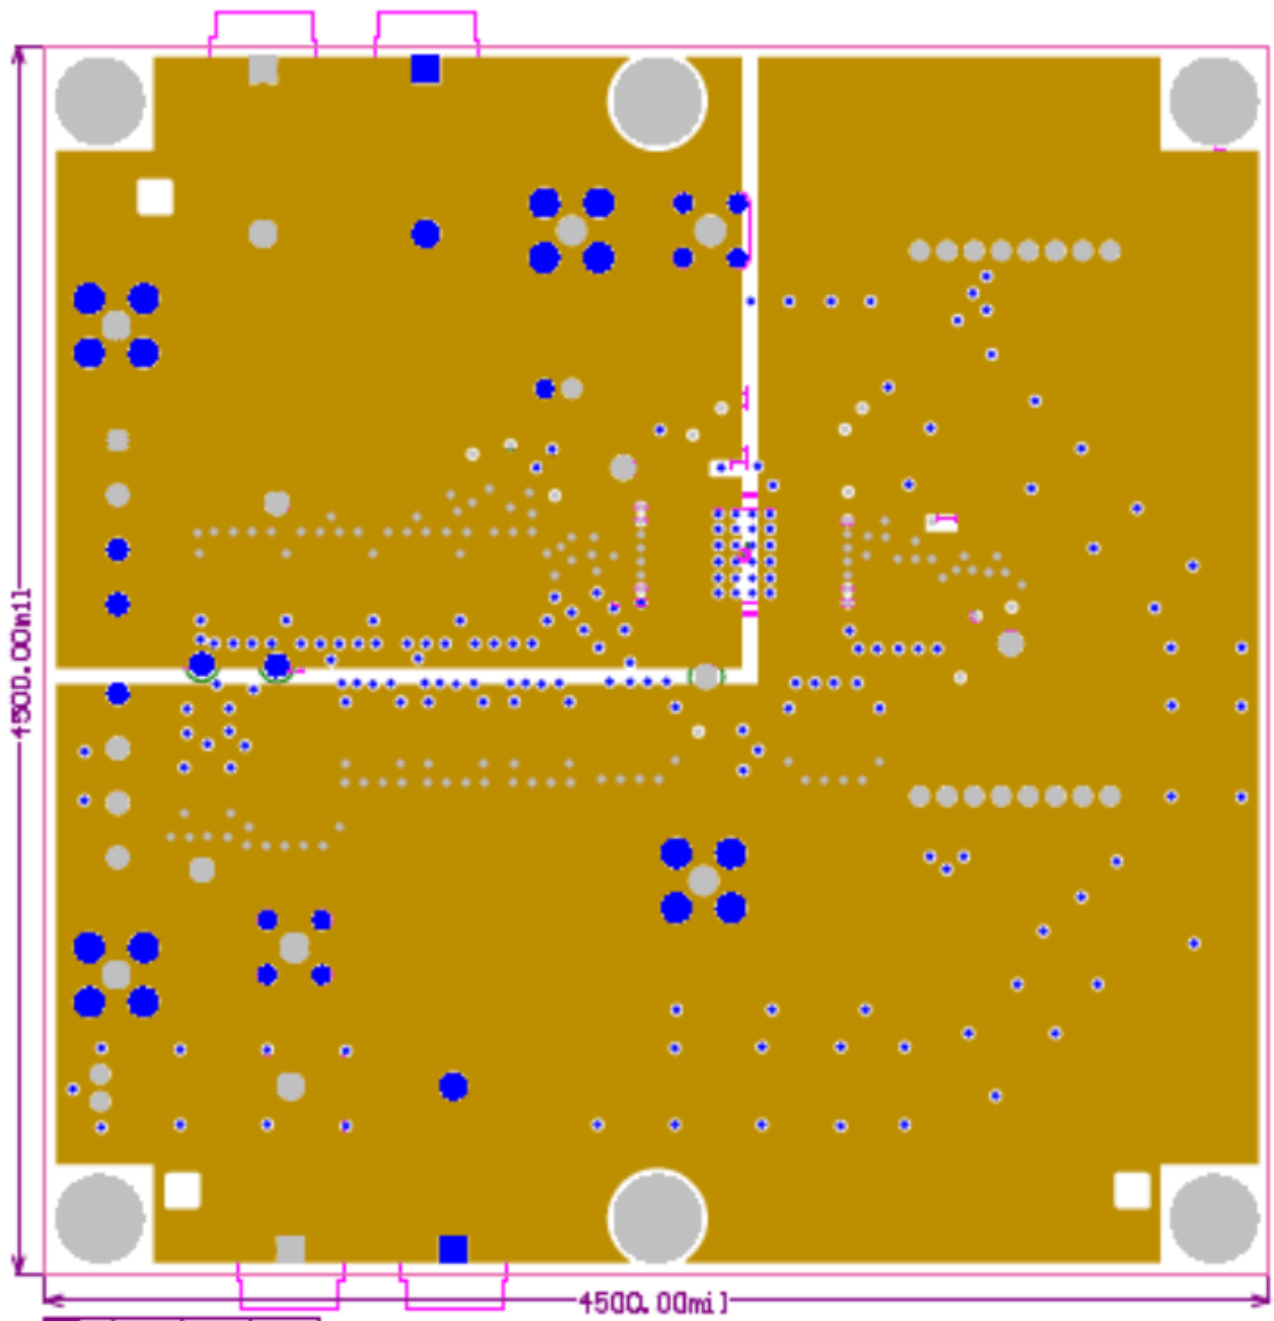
Board Layout - Second Layer (Mid Layer 1)
